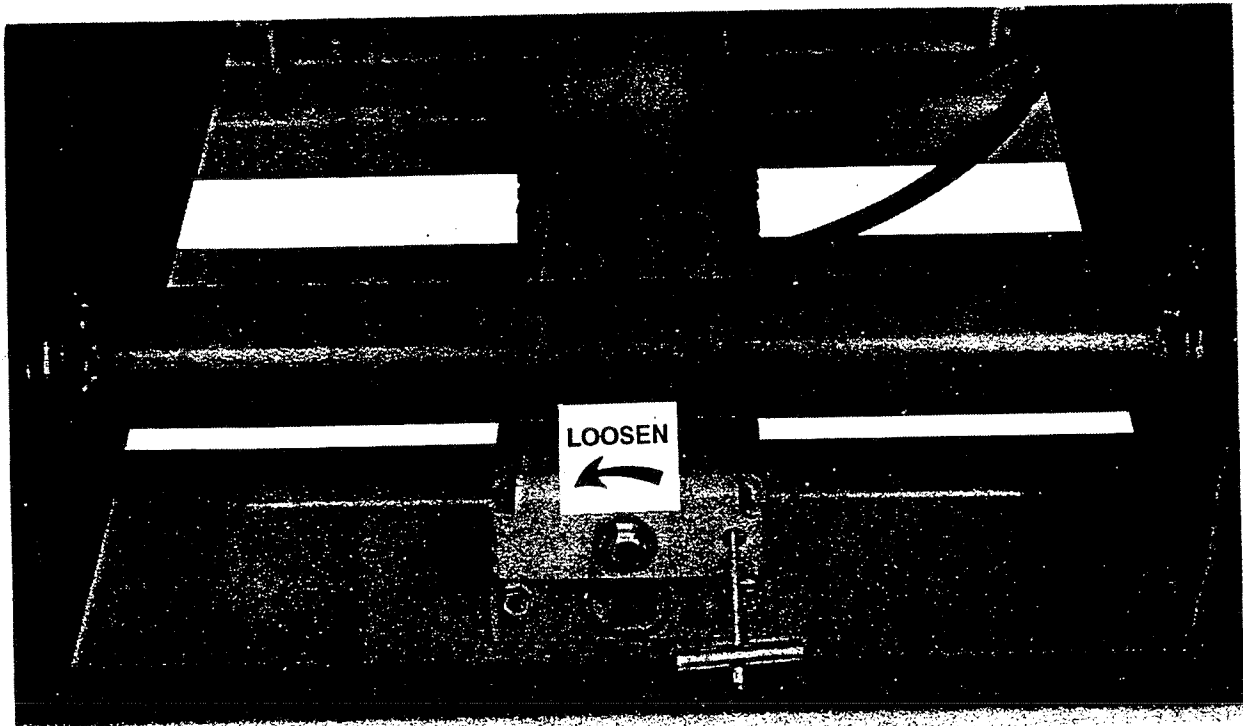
Brake Release Actuating Cable and Brake Spring Adjusting Bolt
